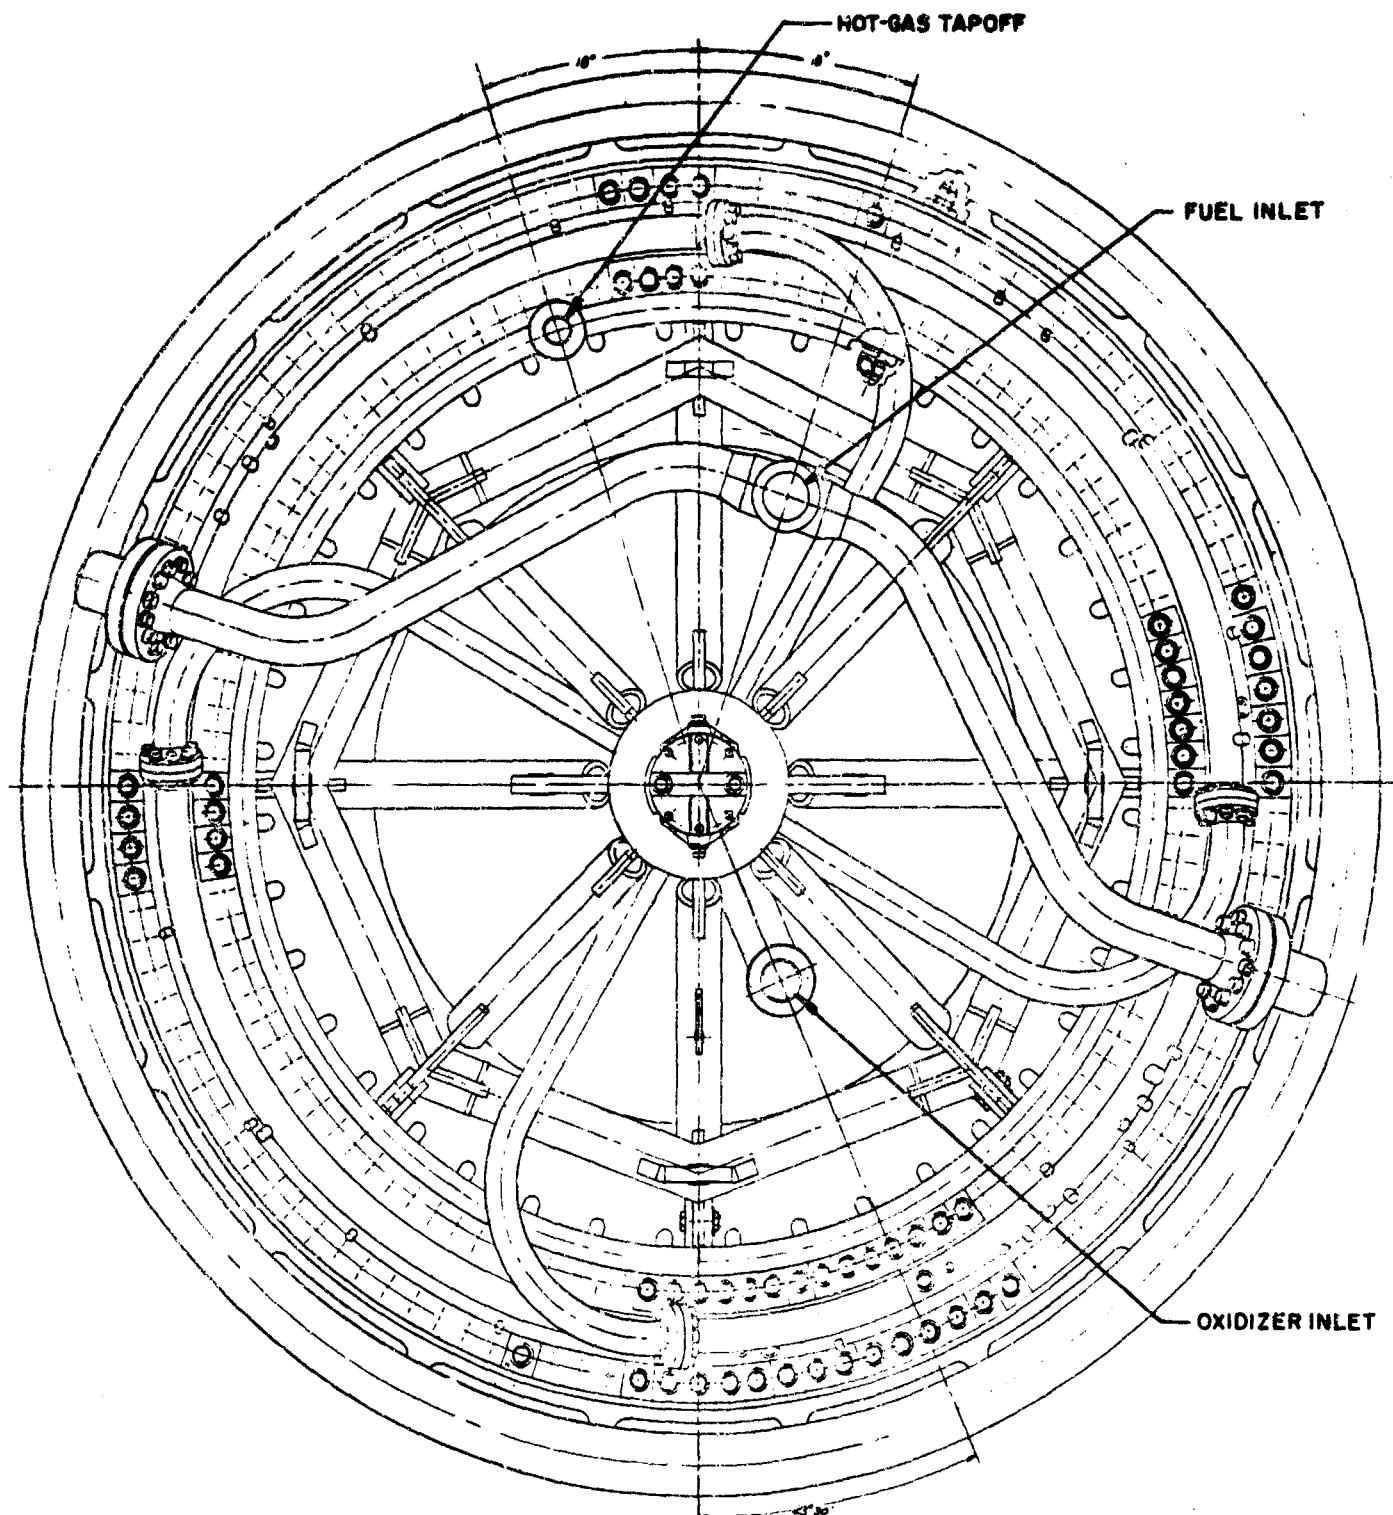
250K Solid Wall Thrust Chamber Inner Body Assembly
